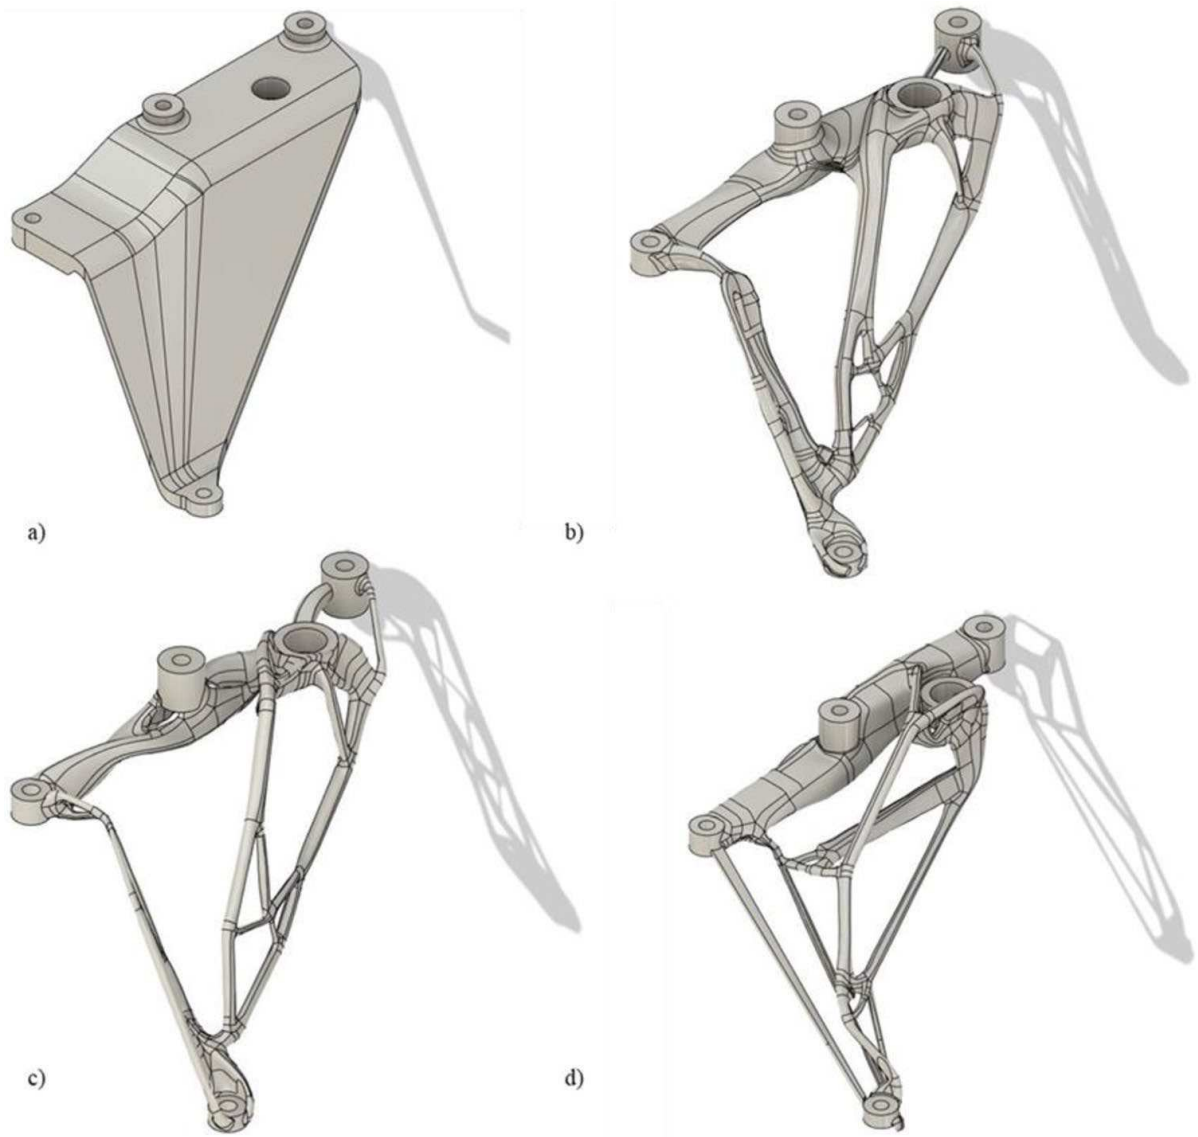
The geometries employed in the analysis: a) initial shape, b) optimized shape manufactured by SM, c) optimized shape manufactured by AM and d) optimized shape manufactured by CP
